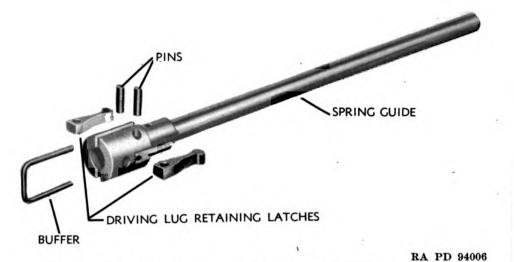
20-mm hydraulic charger M5—Parts of spring guide and driving lug retaining assembly.
